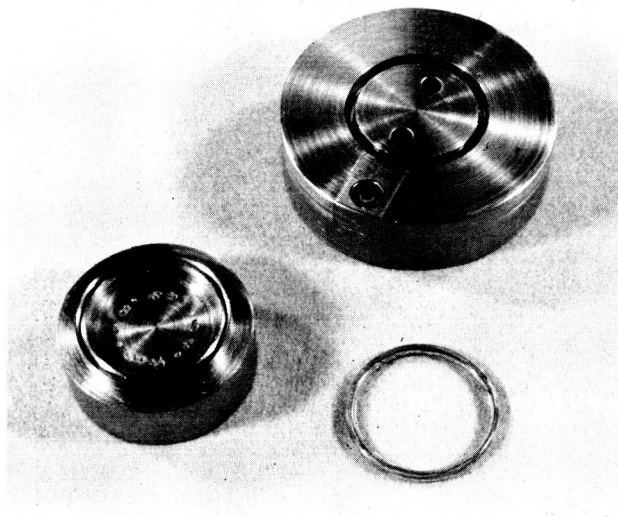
Encapsulating Mold for the Circumferentially Wound O-Rings
